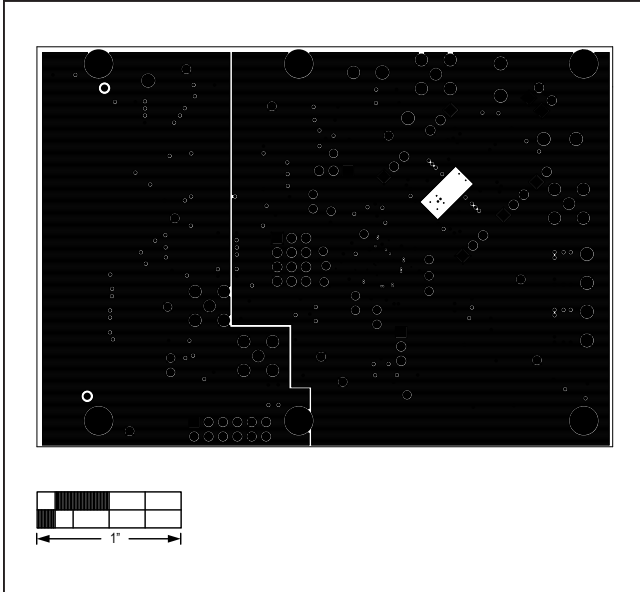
MAX11905 Differential EV Kit PCB Layout—Layer 5
